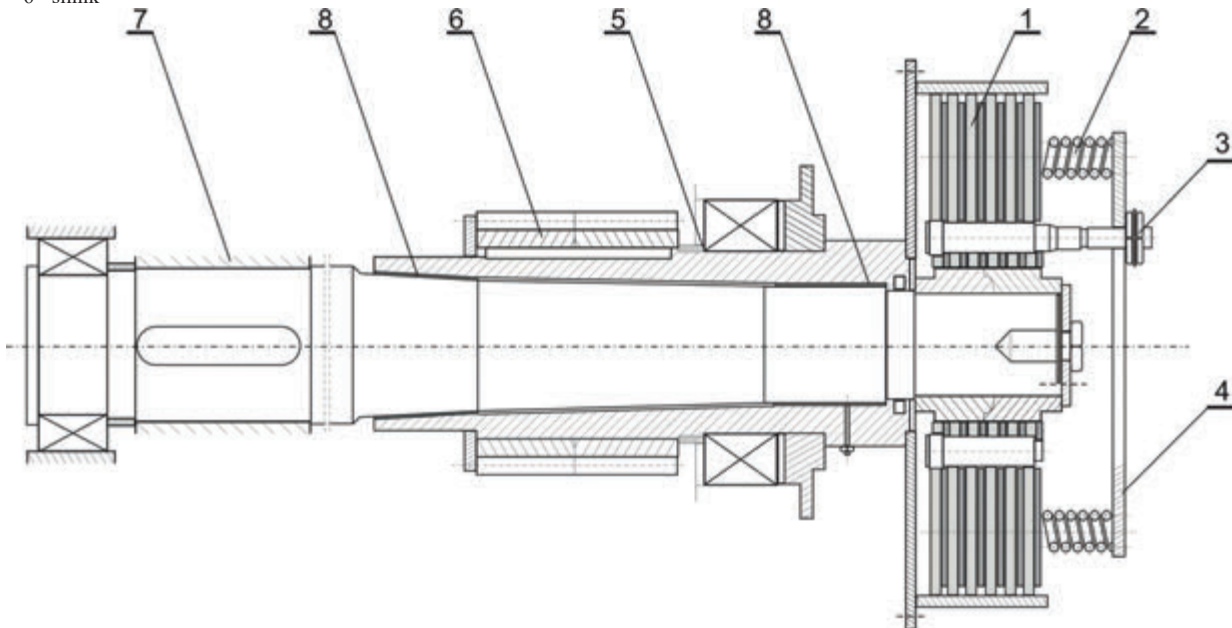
Multi-plate friction clutch used in bucket wheel drive for drive units [10]
